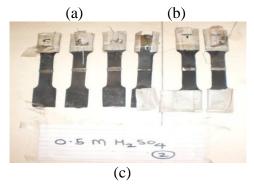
Welded tensile samples of GTAW, SMAW & GMAW for chemical exposure
